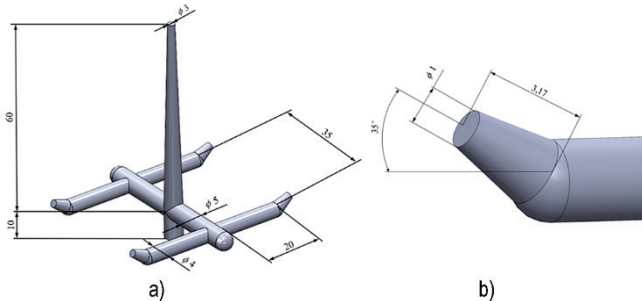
Mould runner system: a) runner system elements, b) tunnel gate [6]
